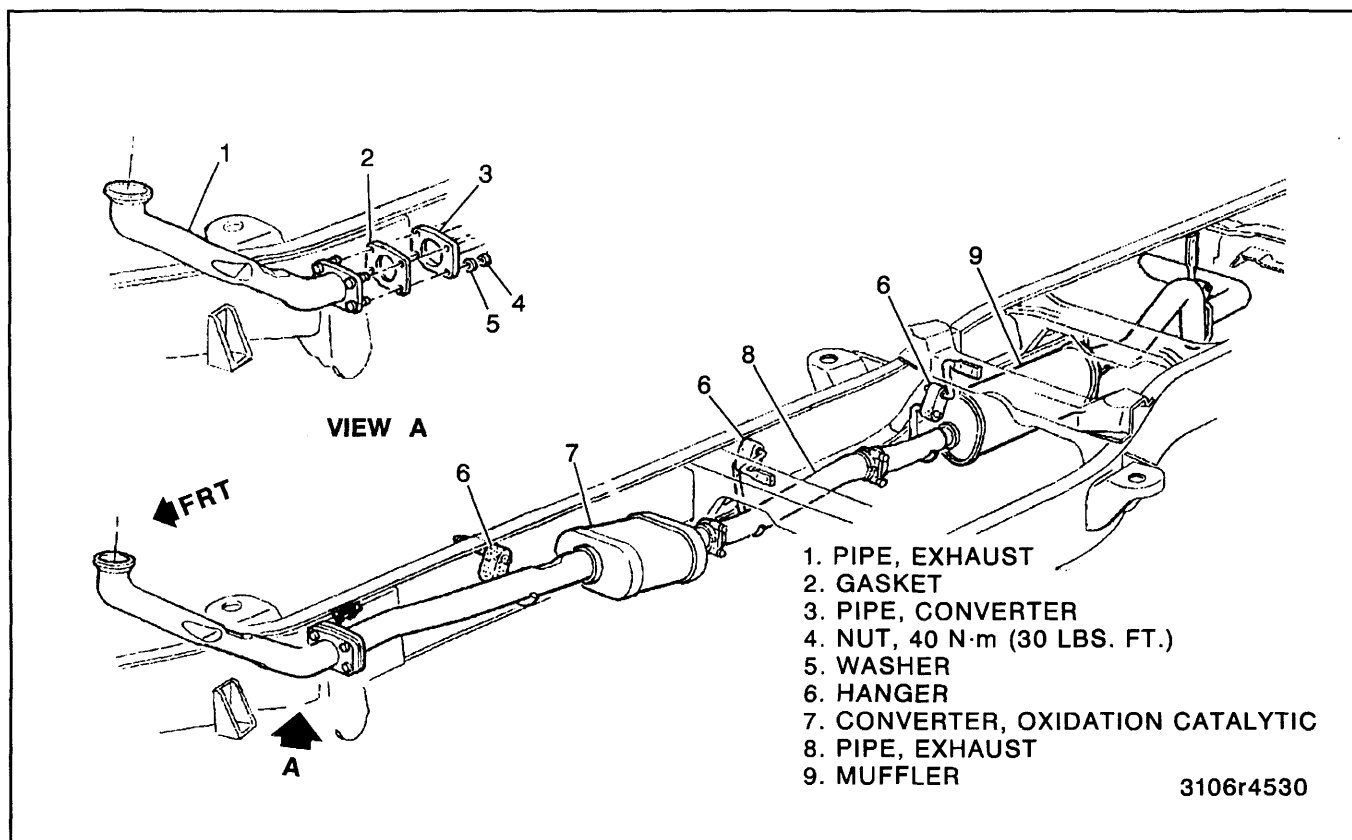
Exhaust System - 6.5L 3500 HD Chassis Cab (L65, VIN F)
